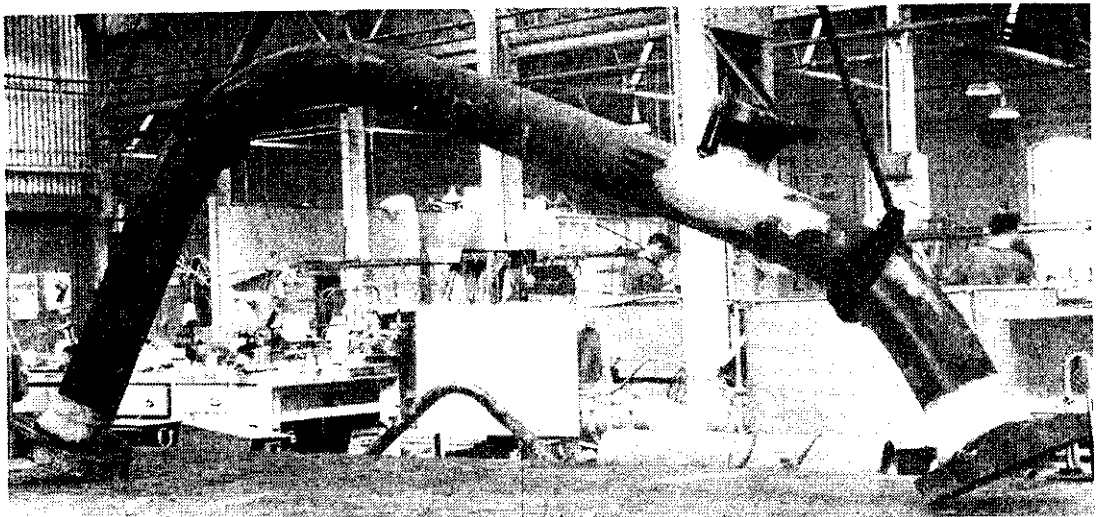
APPEARANCE OF DEFECTIVE PIPE. CRACK IS ON THE BRANCH PIPE
